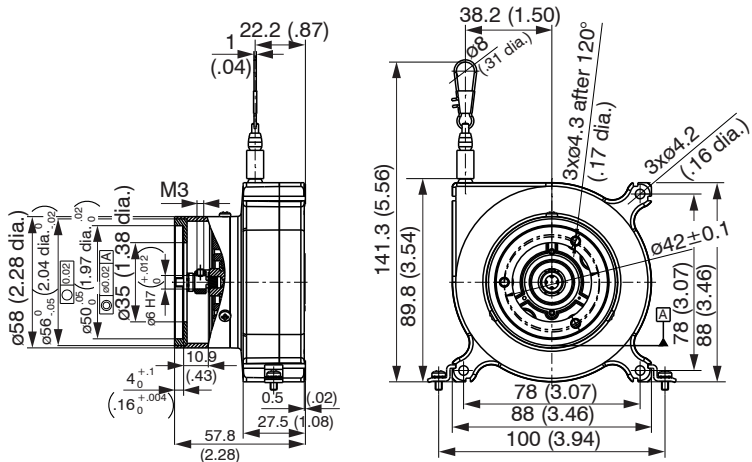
Dimensional drawing WPS-xxx-MK88-M, dimensions in mm (inches), not to scale
